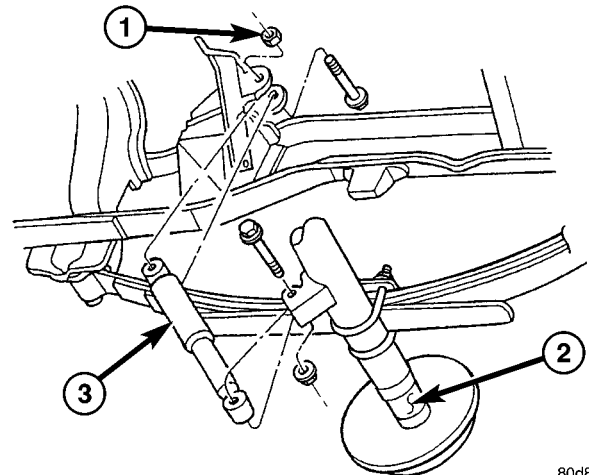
AUXILIARY SPRING BUMPER (3500)
